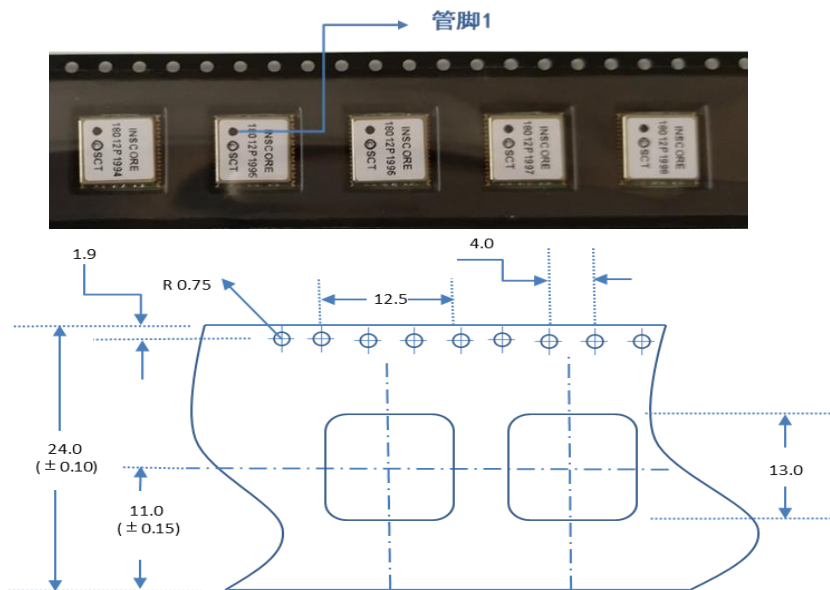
Tape-and-Reel Appearance, Dimensions, and Parameters
